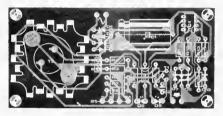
The track pattern and component overlay of the universal NiCad charger. Transistor T3 must be mounted on a heat sink.
